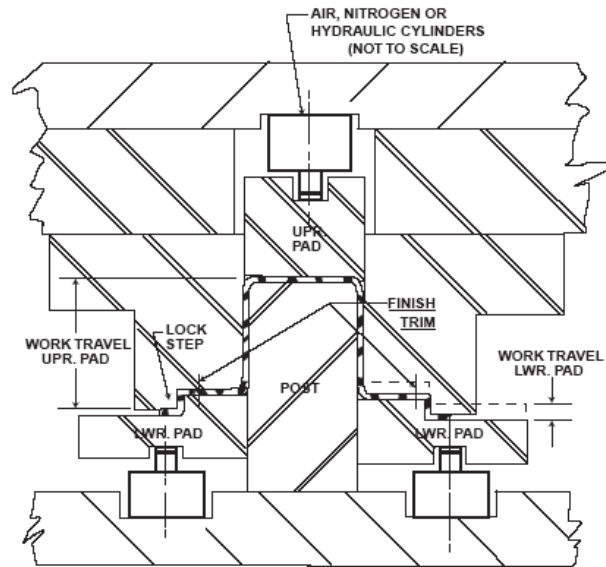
Post-Stretch Form Die (Upper and Lower Pads)
